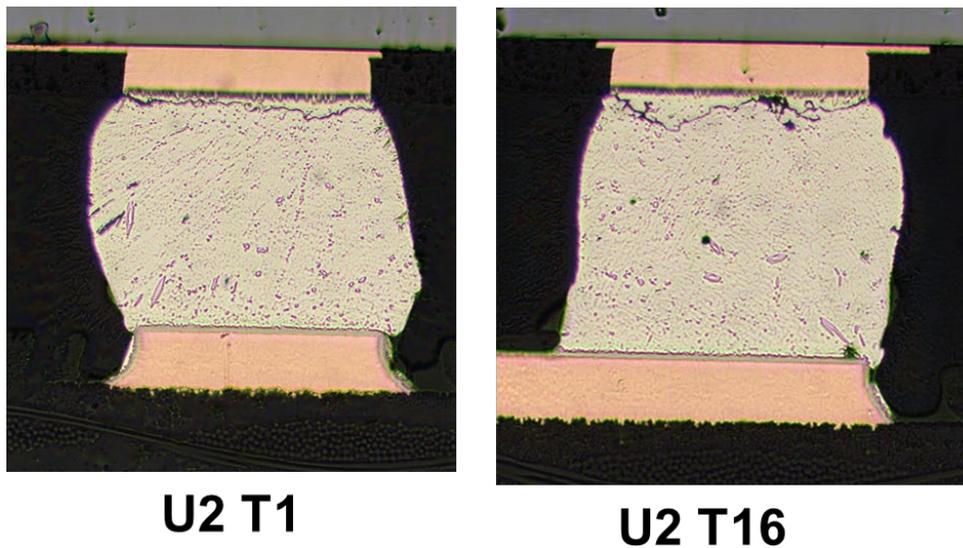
Cross-section of failed solder joints from two sample channels on a single test board. Similar for both the RF and DC monitored nets
